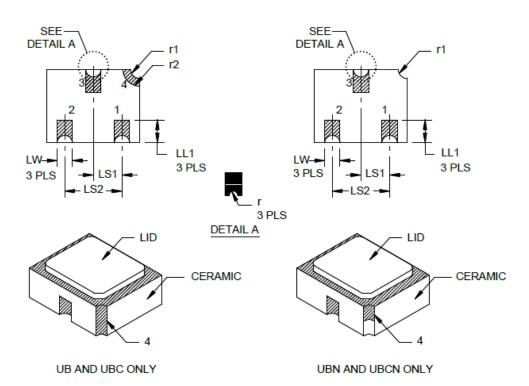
Physical dimensions for 3 and 4 terminal SMD packages (UB, UBN, UBC, and UBCN).
